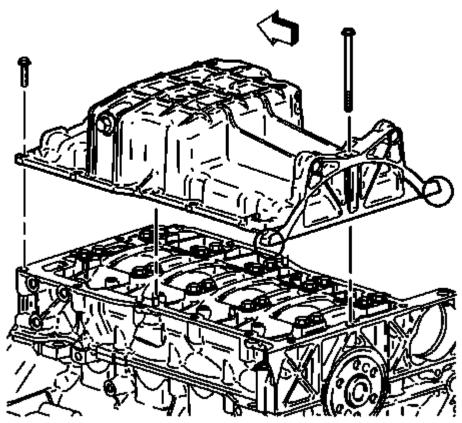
Oil Pan Courtesy of GENERAL MOTORS COMPANY
